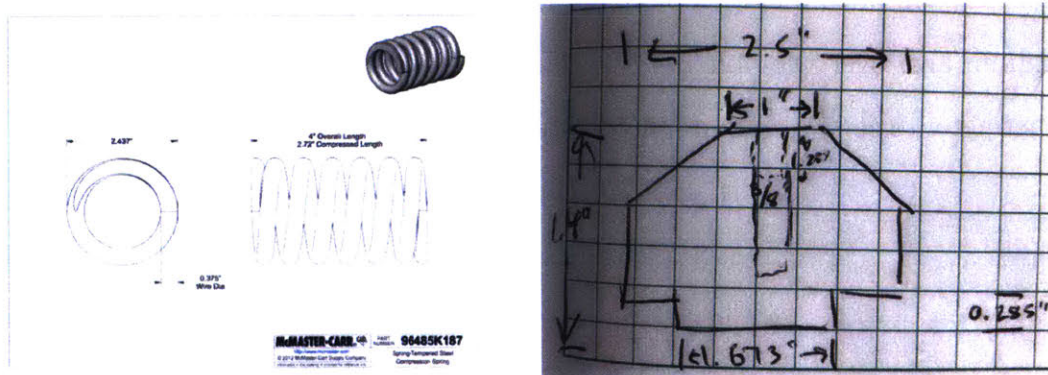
Shock test compression spring and cap for tooling ball [McMaster-Carr, 2017]
